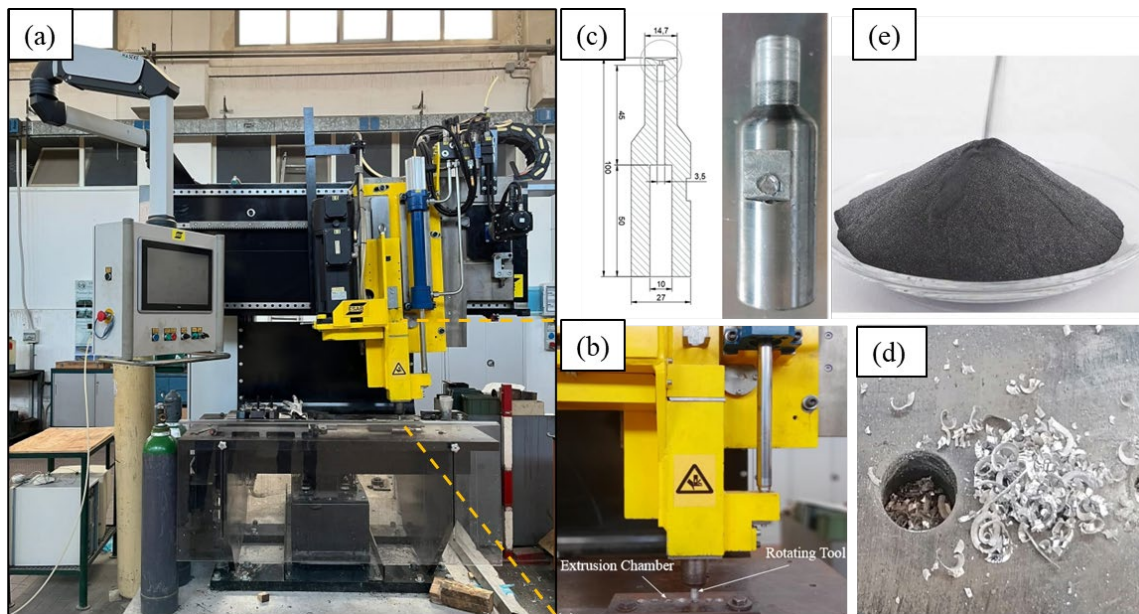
(a) FSE setup for the experimental campaign (b) FSE Fixture (c) Extrusion tool (d) Extrusion Chamber (e) SiC powder.
